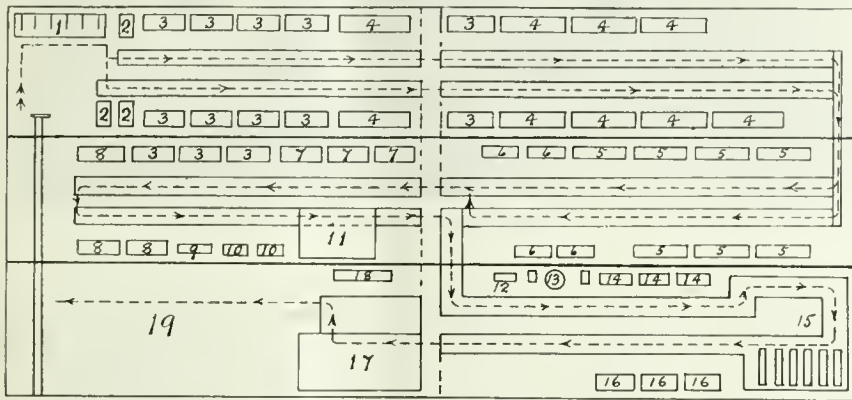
LAYOUT OF SHOP ARRANGEMENT SHOWING PATH OF WORK DURING MANUFACTURE.
